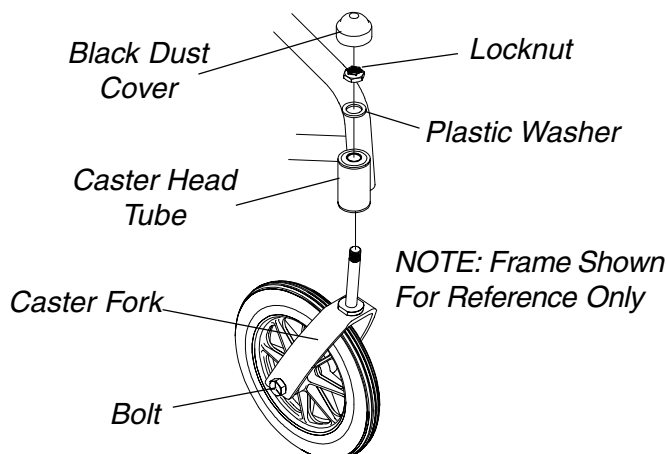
REMOVING THE EXISTING CASTER FORK
